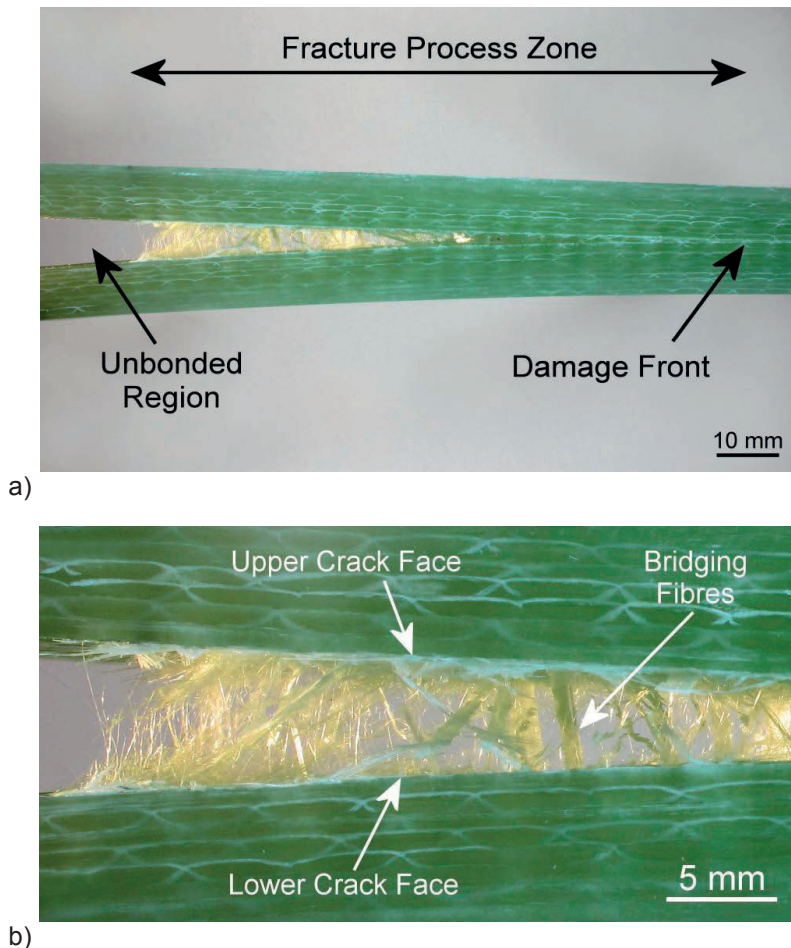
Photographs of a large-scale fracture process zone developing during delamination of a glass fibre polymer-matrix composite - a fracture mode encountered e.g. in load-carrying structures in boats and wind turbine blades. (a) The fracture process zone spans from the unbonded region (flaw) to the damage front. (b) A close view of the fracture process zone reveals crack bridging by fibres.
